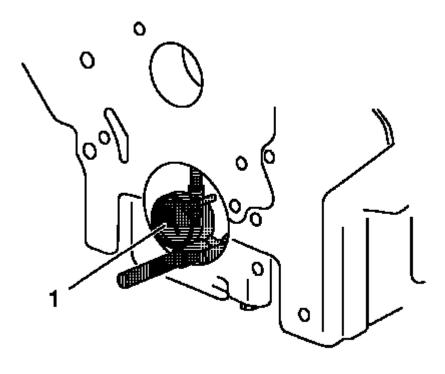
Measuring Bearing Bore Concentricity And Alignment Using Gauge Tool Courtesy of GENERAL MOTORS COMPANY
